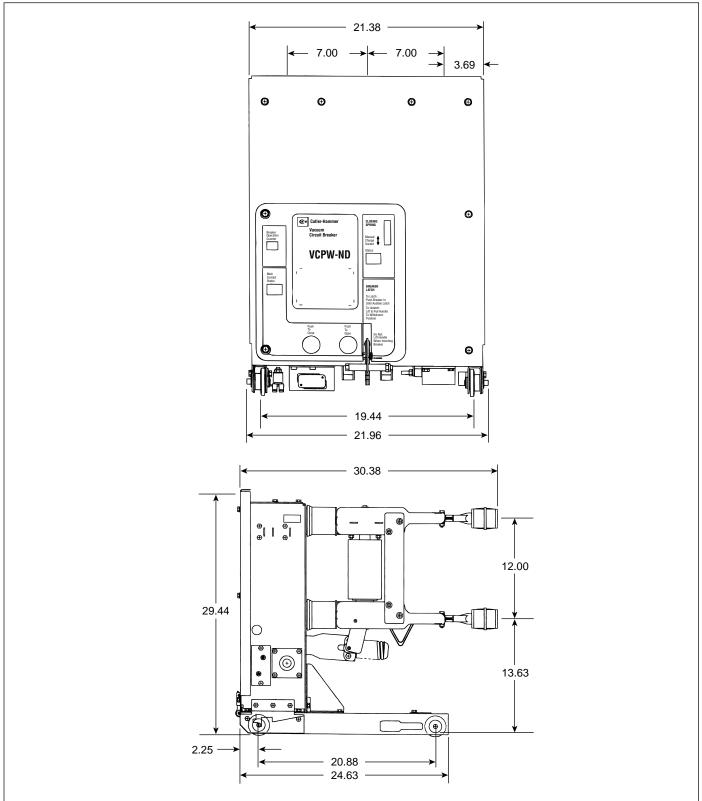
Type VCPW-ND Circuit Breaker Outlines and Dimensions in inches
